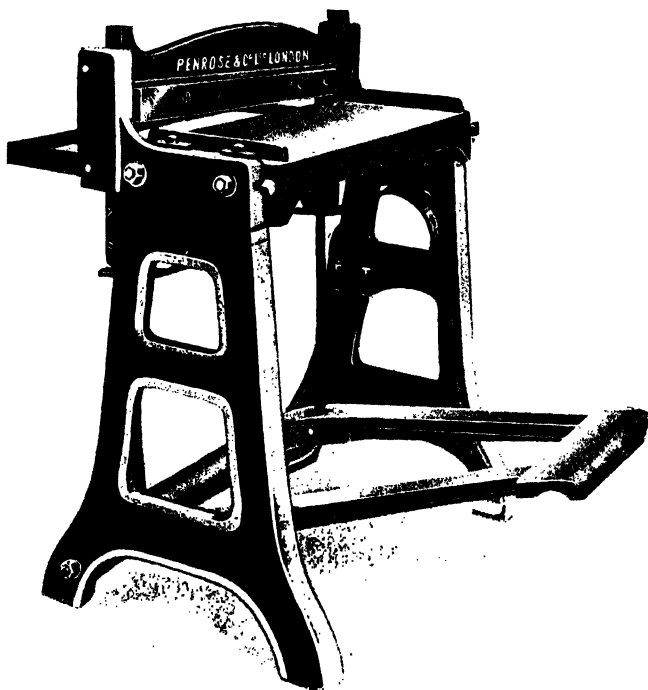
TREADLE GUILLOTINE CUTTER FOR ZINC.
